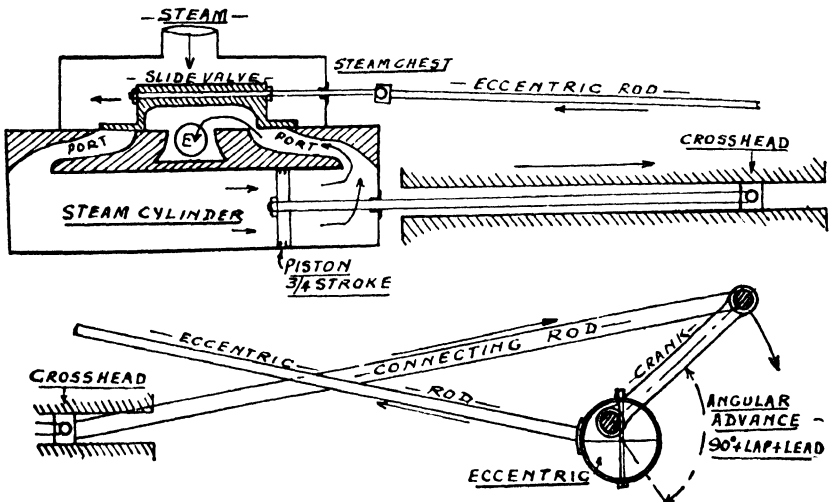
Steam Cylinder, Slide-valve, Crank and Eccentric.
